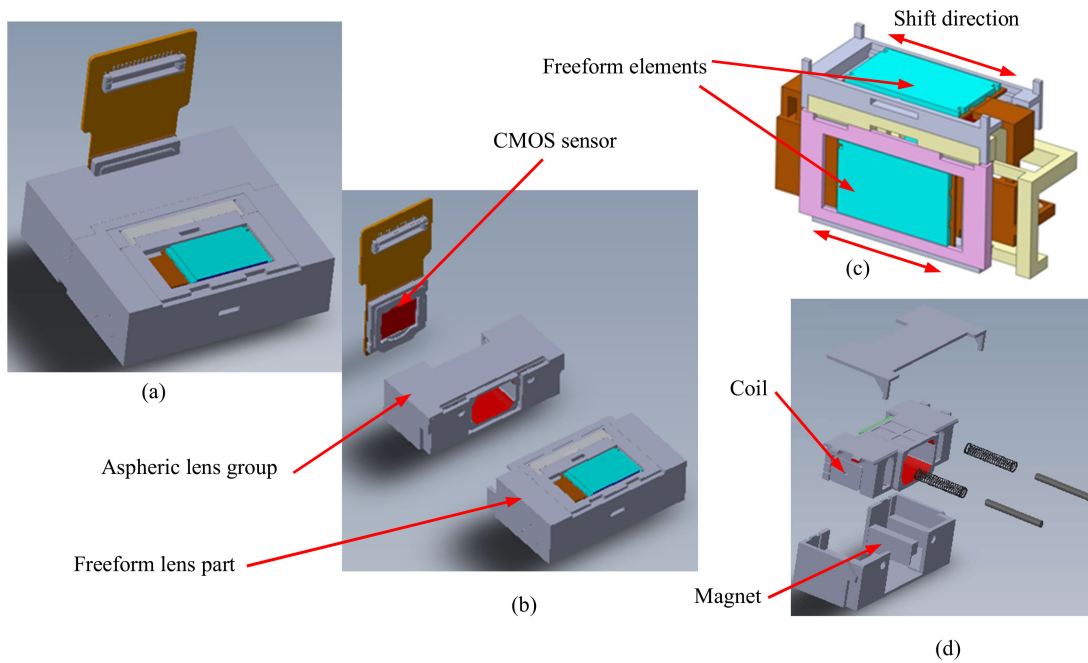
Opto-mechanical model. (a) Integrated zoom camera module. (b) Exploded view of the zoom camera module. (c) Inner structure of the front zooming part. (d) Exploded view of the rear focusing part.
